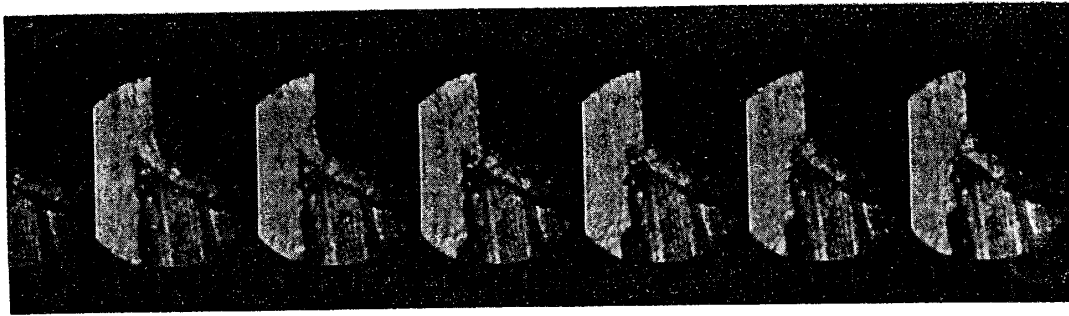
Aluminium Cutting, No Lubricant, the Built-up Edge formed on the Flattened Edge.
